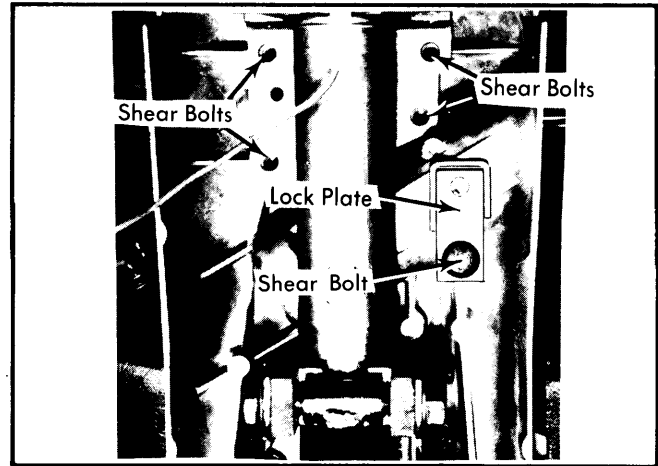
Location of Shear Bolts. View Looking up from Under Steering Column. 530i and 630CSi Shown
